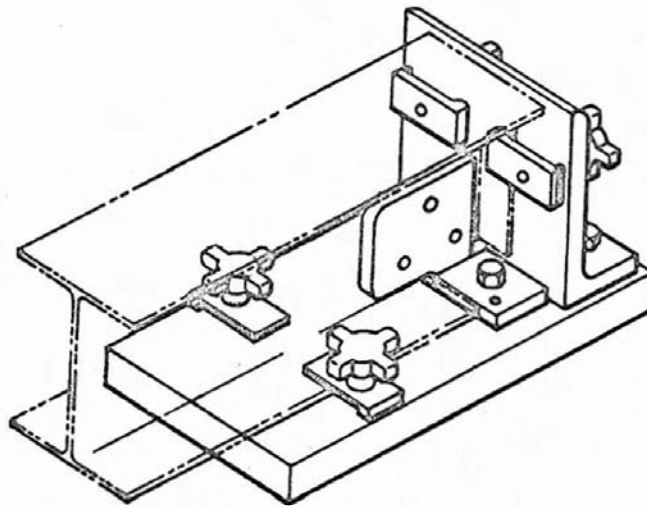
13. Base Heatshield Beam Assembly, Assembly Fixture
